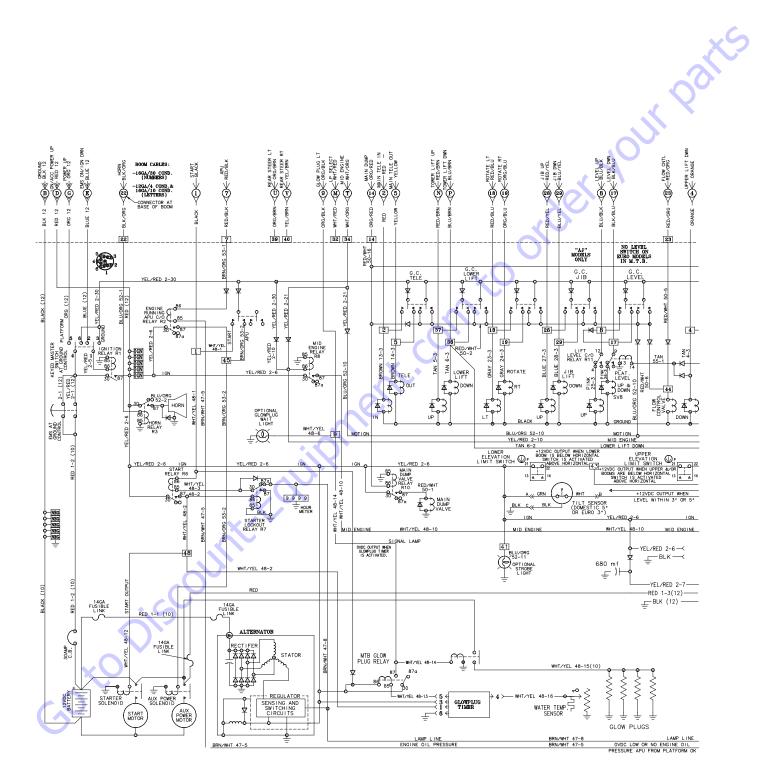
Electrical Schematic - Boom, Turntable, Chassis - Isuzu - Sheet 1
